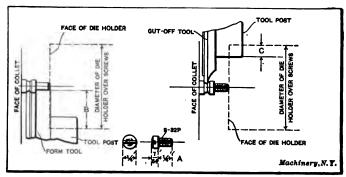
Diagram illustrating Method of Finding Clearance for Die Holder
